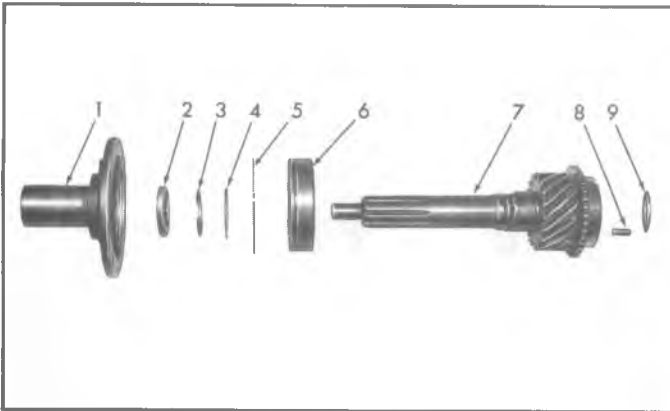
C—Clutch Gear, Bearing, Retainer and Components
